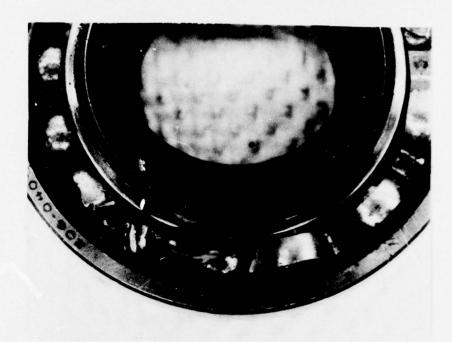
Bearing S/N TRL-17. 2.5x Enlarged View.
